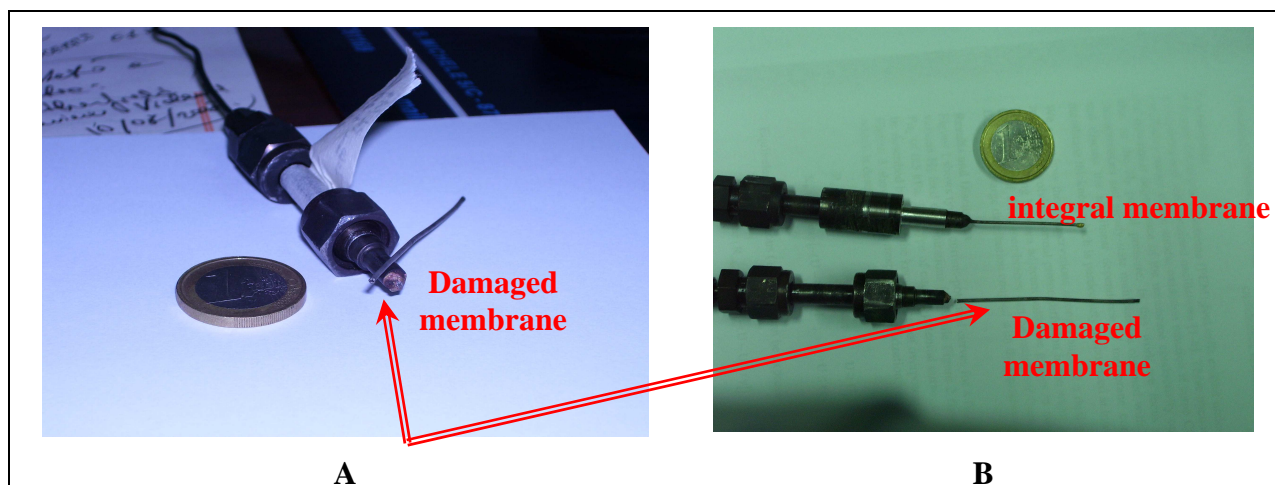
MR after a programmed cycle of experimental tests at 600°C. Breaking in braze-welded points.
